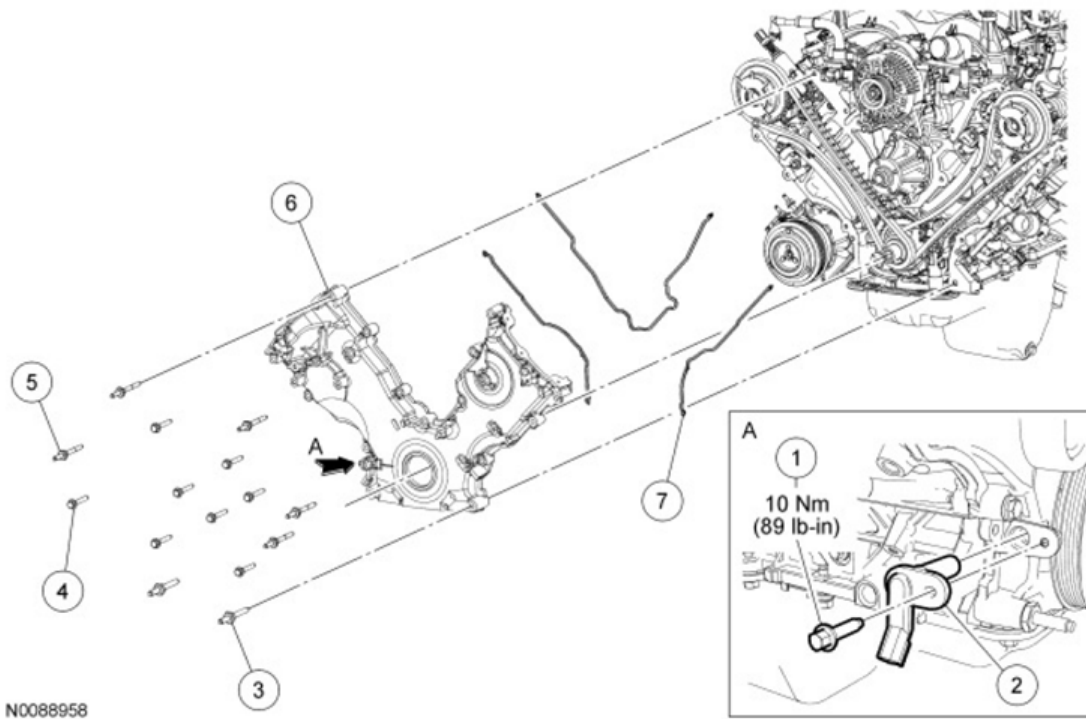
Identifying Crankshaft Position Sensor, Engine Front Cover And Gaskets With Torque Specifications
